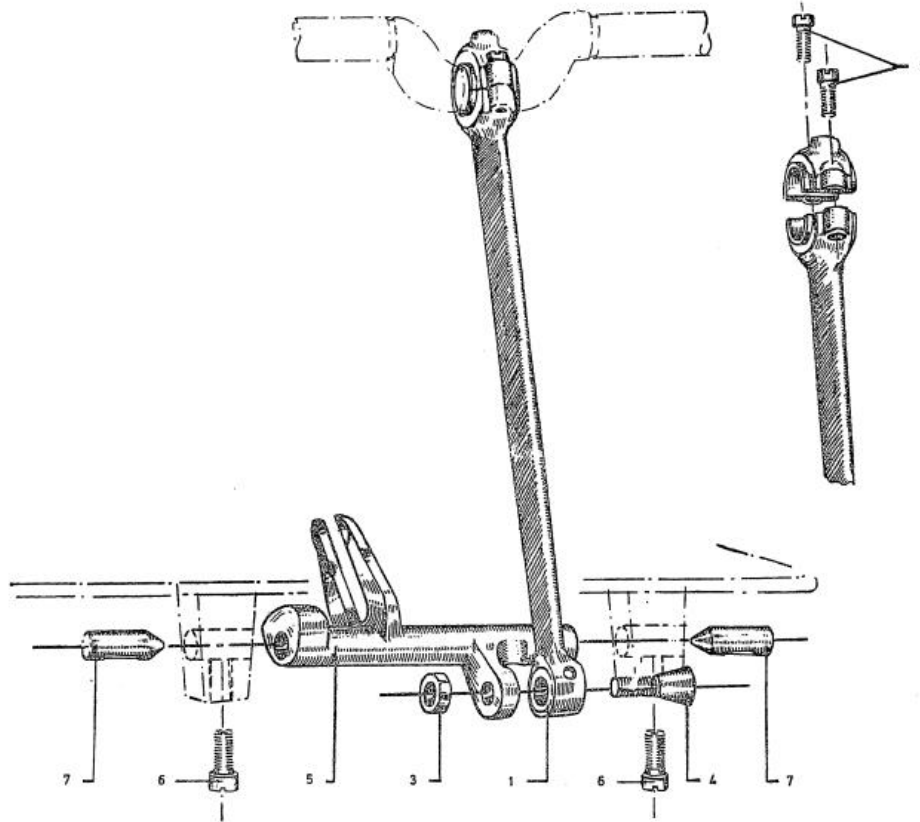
CONNECTING ROD AND OSCILLATING ROCK SHAFT ASSEMBLY
